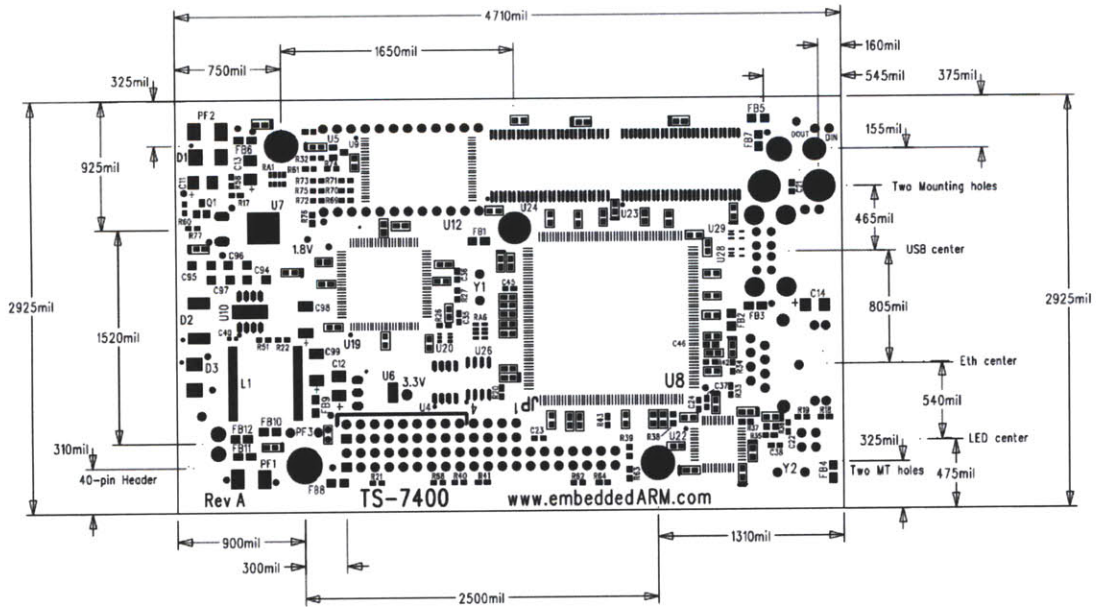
TS-7400 embedded computer module board mechanical layout.
